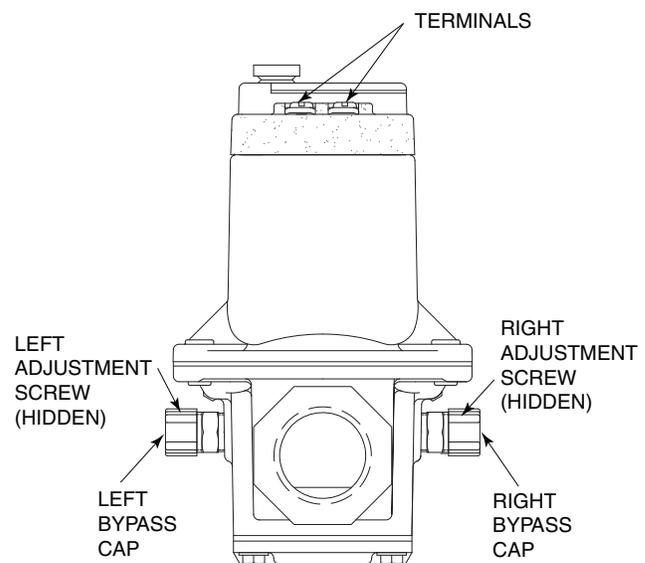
Modulating Gas Valve Bypass Adjustment
